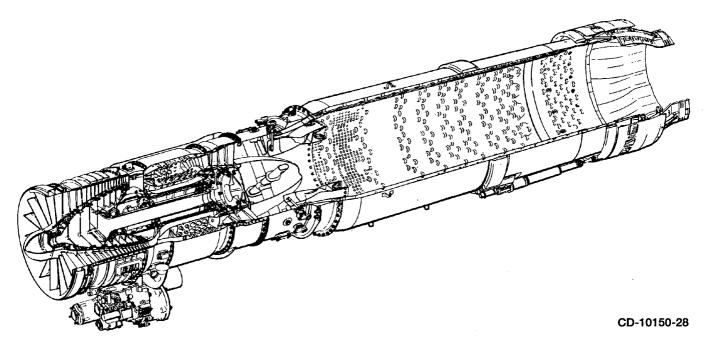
Cutaway of J85-GE-5L afterburning turbojet engine.
